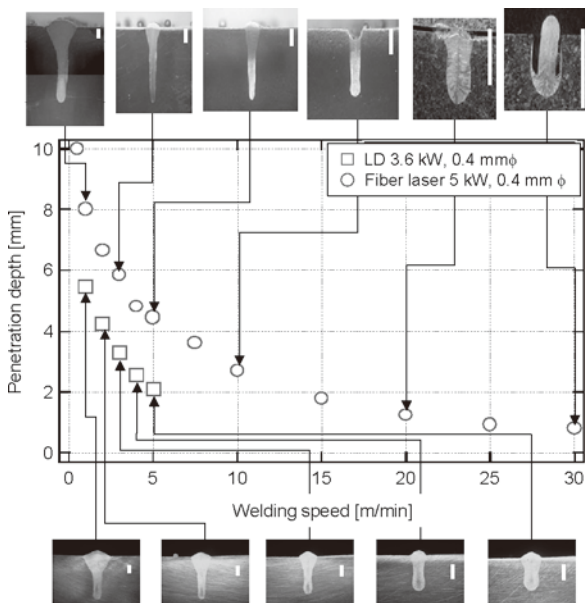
Typical welding results for a 5-kW-fiber laser and a 3.6-kW-LD.
